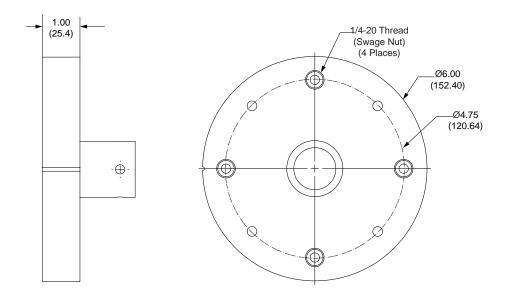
Dimensions, Camera Base. Dimensions in inches (mm) (part of Base-Tube Assy, CohuHD p/n 8163150-001)
